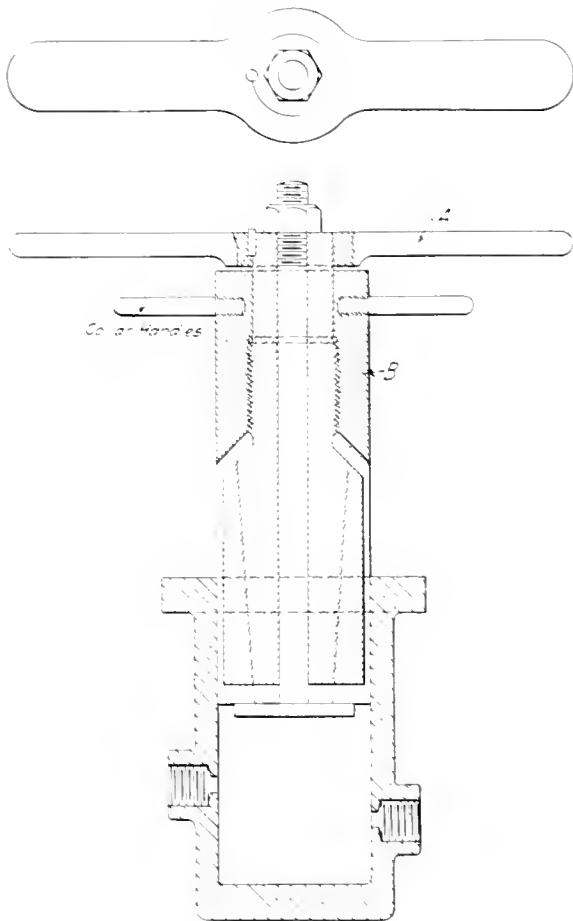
Hand Reamer for Boring Bell Ringer Cylinders.
